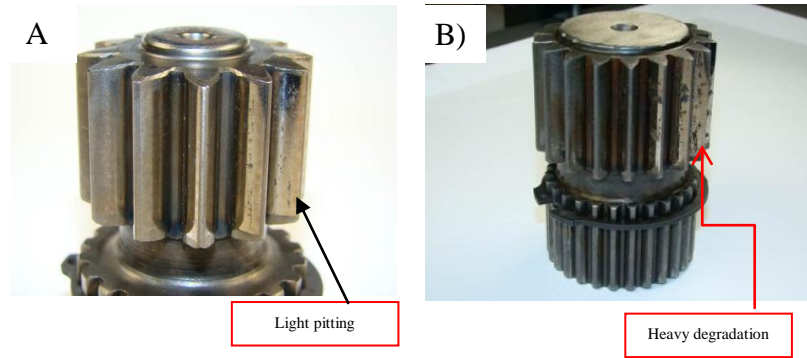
Sun gears inspection A) first stage B) second stage
